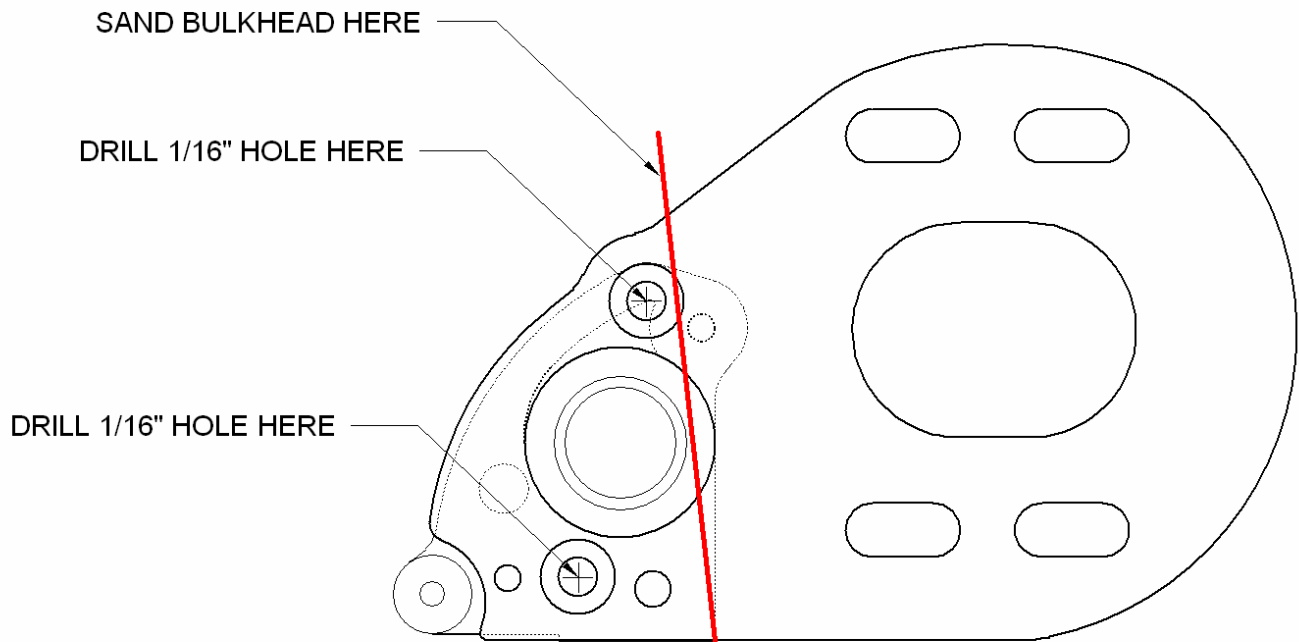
Drill two 1/16" holes into the rear bulkhead as shown.
